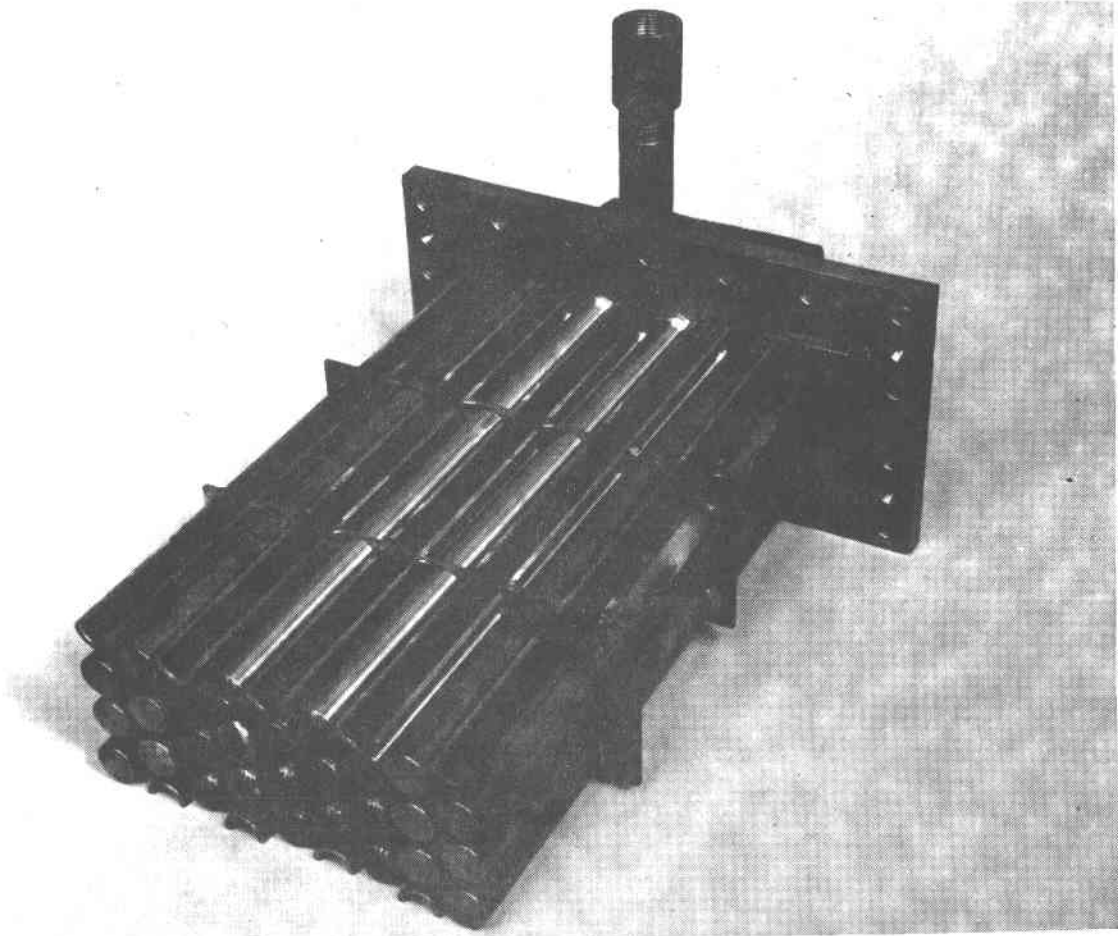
Flowby Module Tube Sheet Installed on Active Tube Assembly
